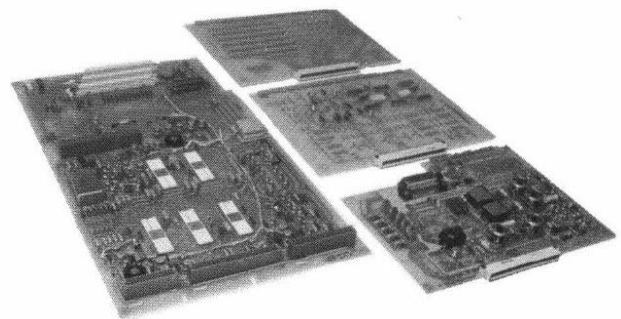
Printed-wiring boards used in Teleprinter No. 23
